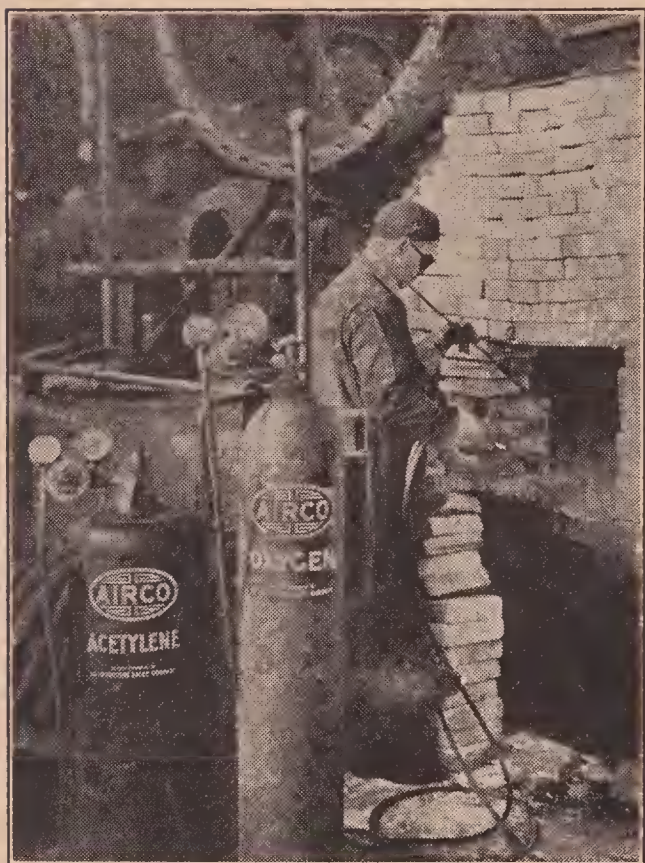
Welding with an acetylene torch. A cracked cylinder of a locomotive is being welded just inside the opening in the temporary brick wall.
